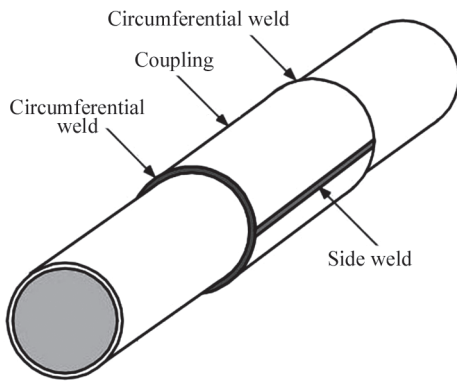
Reinforcing a defective pipeline section with a welded coupling
